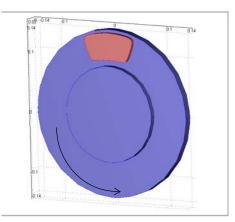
Geometry and dimensions of the modeled brake disc, including the brake pad.
